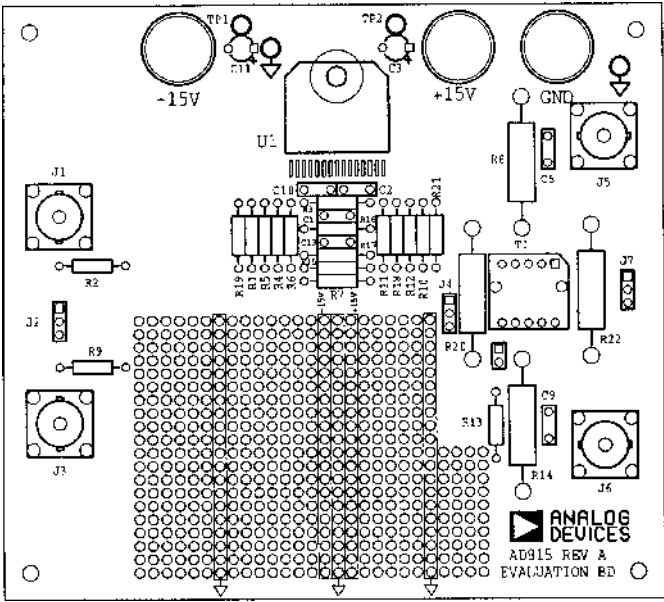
AD815 AVR Evaluation Board Assembly Drawing
